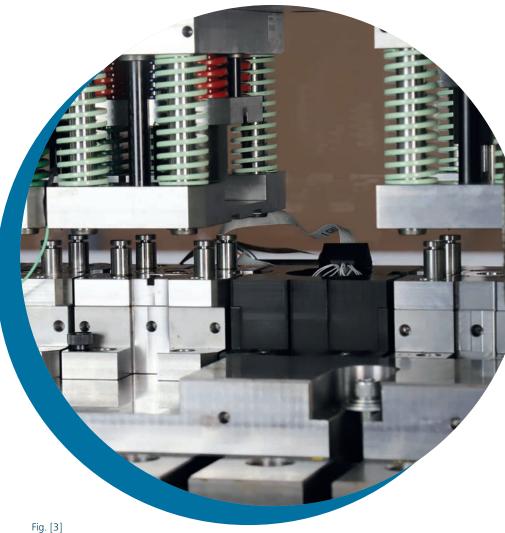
Photometric stereo scanning module lined in progressive die tool
